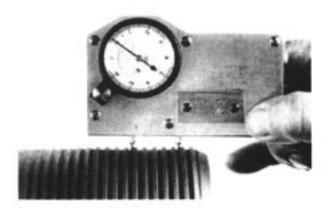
Continuous-Dial Type Gauge Applied to a Setting Standard
